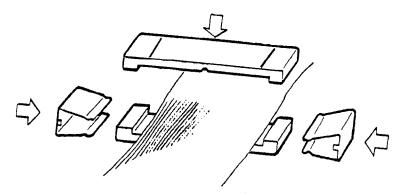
Ferrite Core Installation to MMC-F-11 KTU Ribbon Cable
